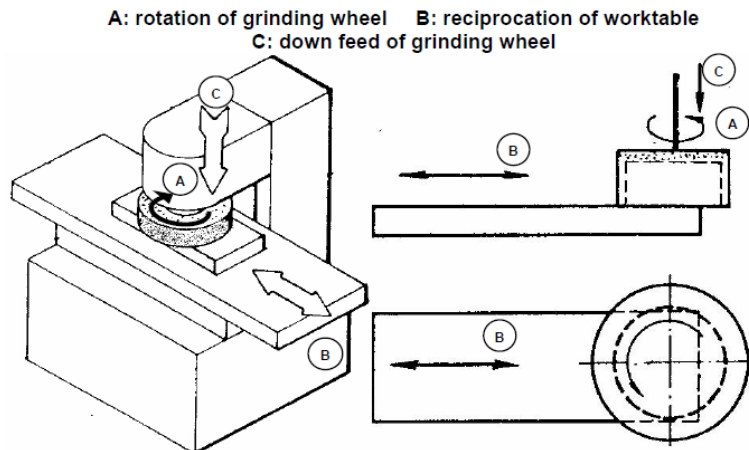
Vertical spindle reciprocating table surface grinder
